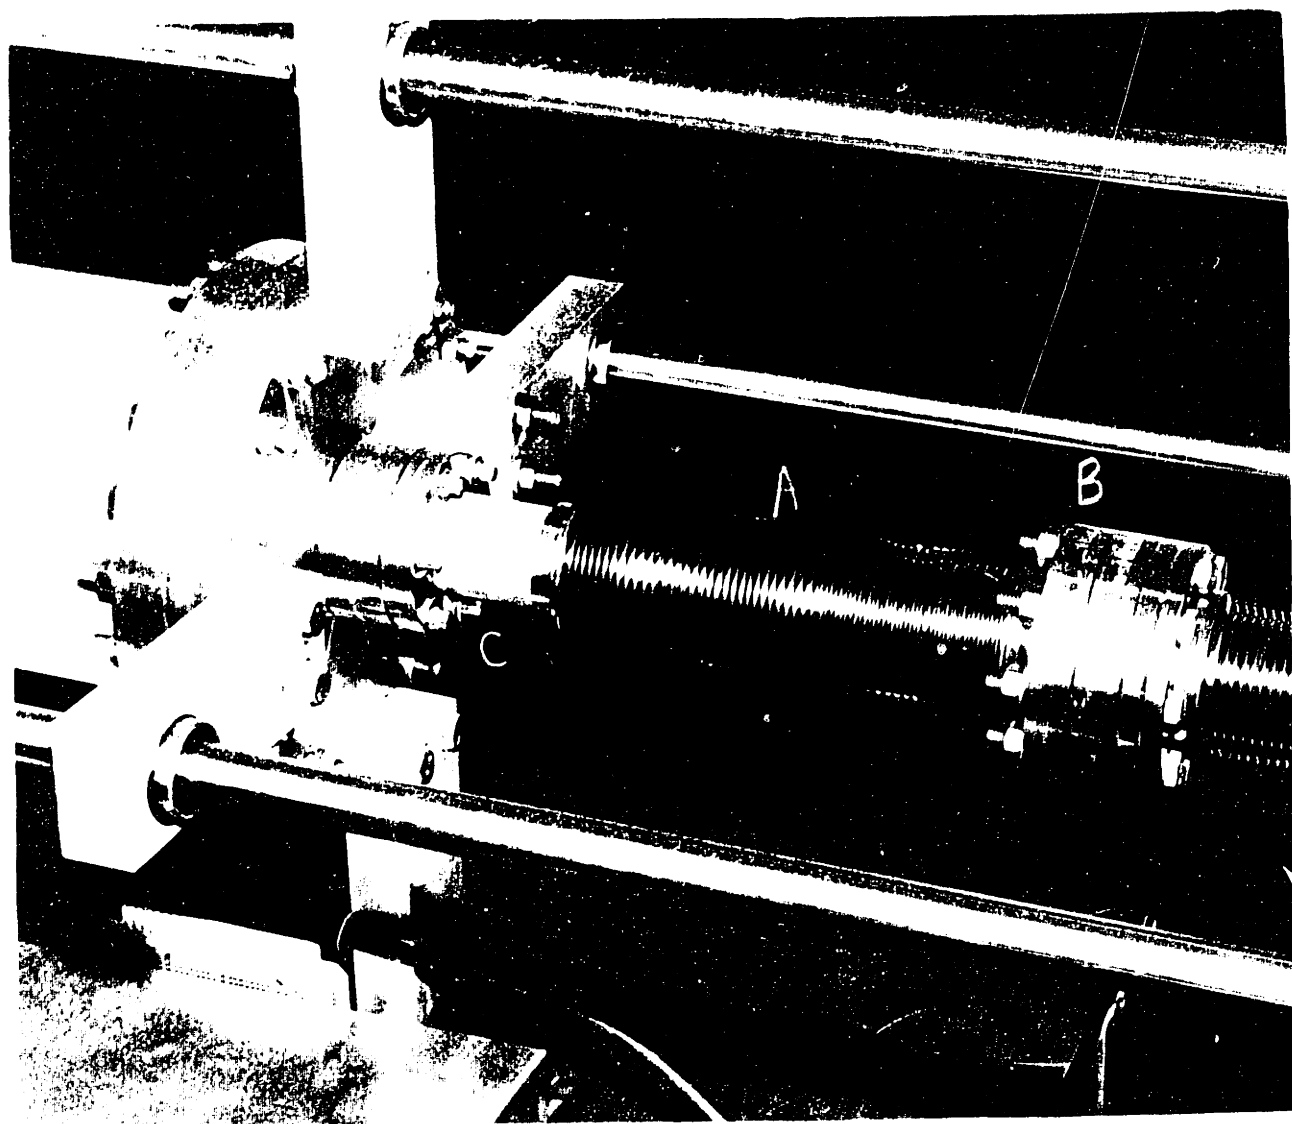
Bellows assembly #1. A: Welded bellows. B: $3\frac{3}{8}$ " flange. C: Half-nipple with $2\frac{3}{4}$ " flange.
